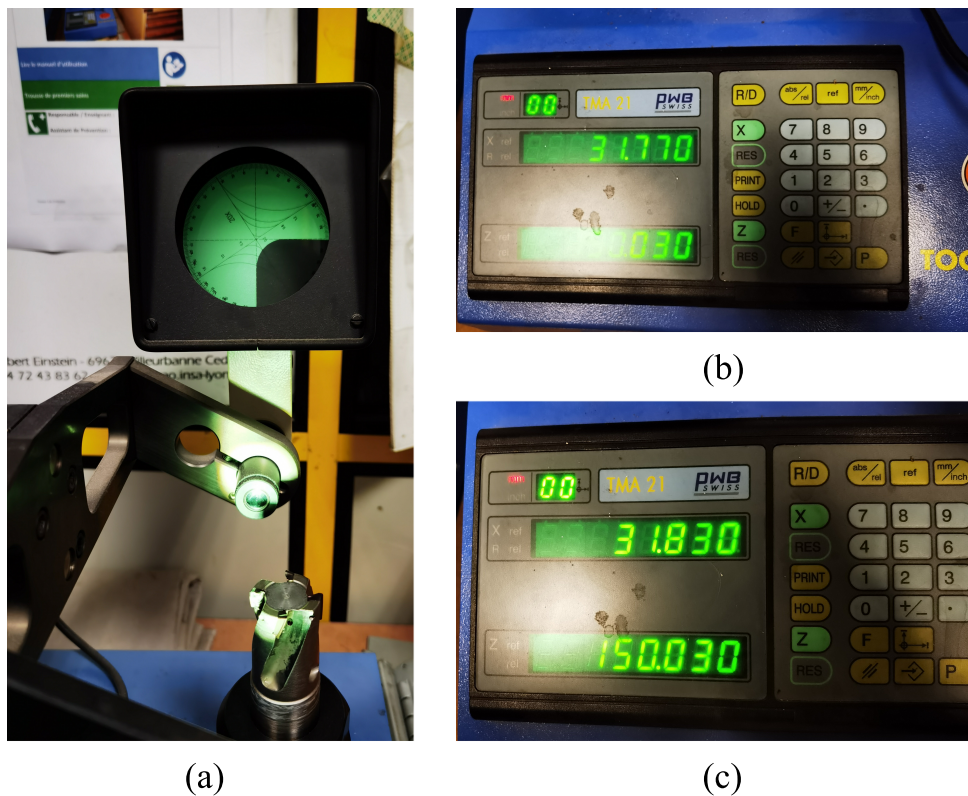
Tool initial condition: (a) end mill inspection display; (b) the tool diameter including 1st, 3rd or 4th tooth is 31.770 mm; (c) the tool diameter including 2nd tooth is 31.830 mm.
